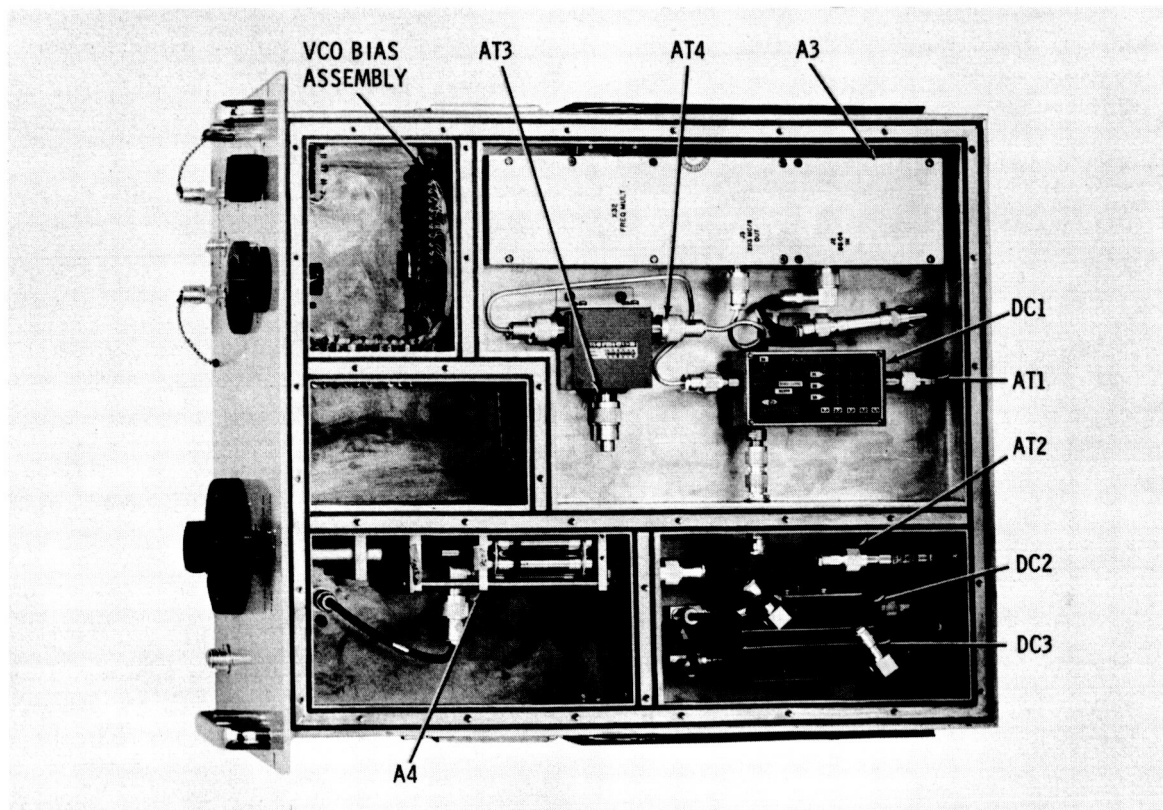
Test Transmitter 1A9, Bottom View, Cover Removed
